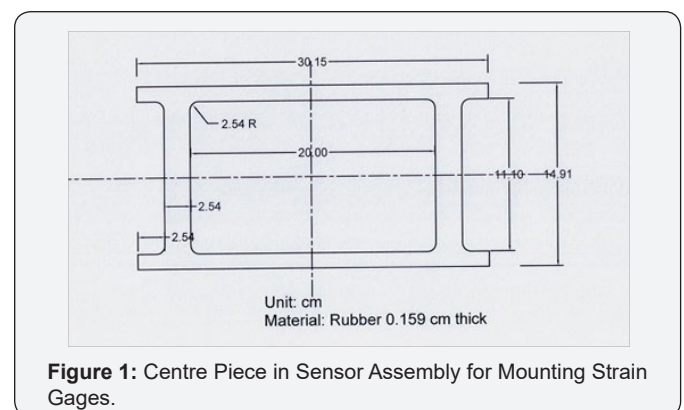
Centre Piece in Sensor Assembly for Mounting Strain Gages.
